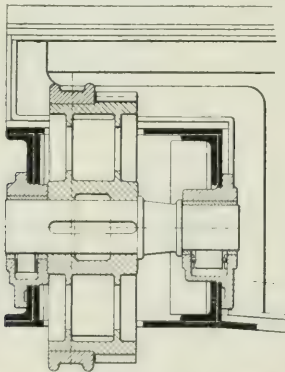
SELF-LUBRICATING AXLE BOXES AND END TRUCK DRIVING WHEEL.
